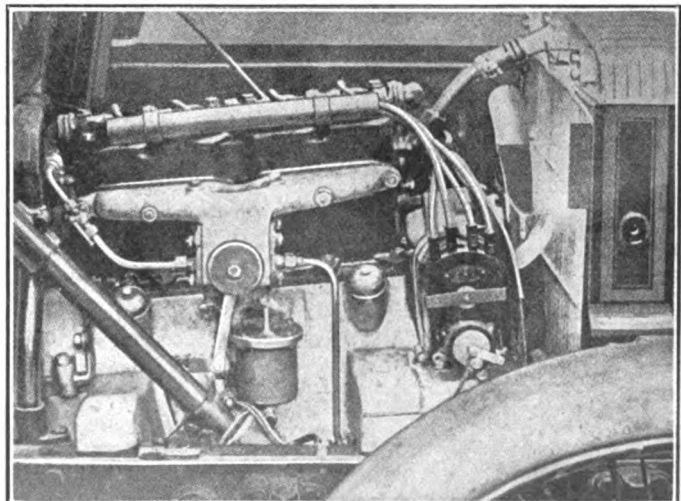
Intake side view of Knight engine, showing clean intake manifold, accessibility of magneto and water connections to carbureter
